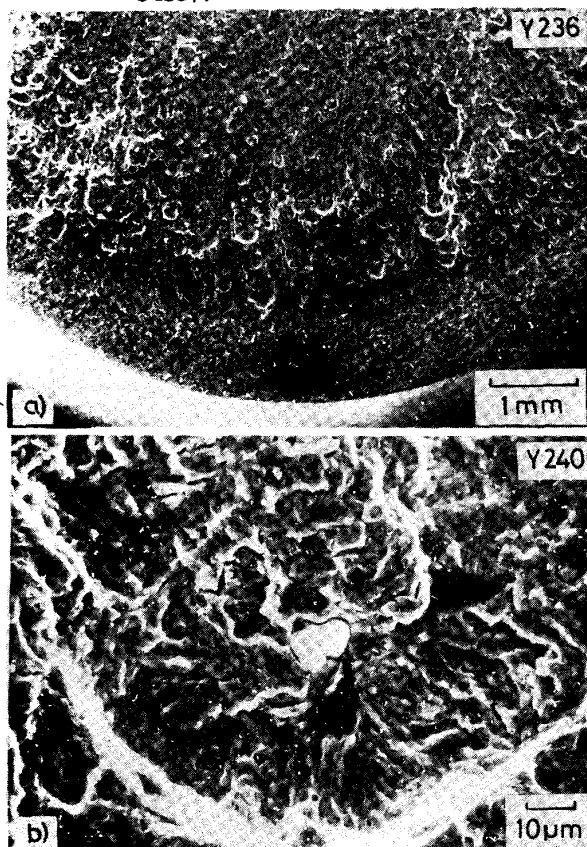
Fractographs for Carburized Steel (H<sub>2</sub> Charged)
